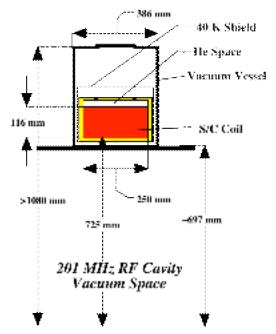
A Cross-section View of One Half of the Coupling Magnet Showing the Magnet Dimensions
